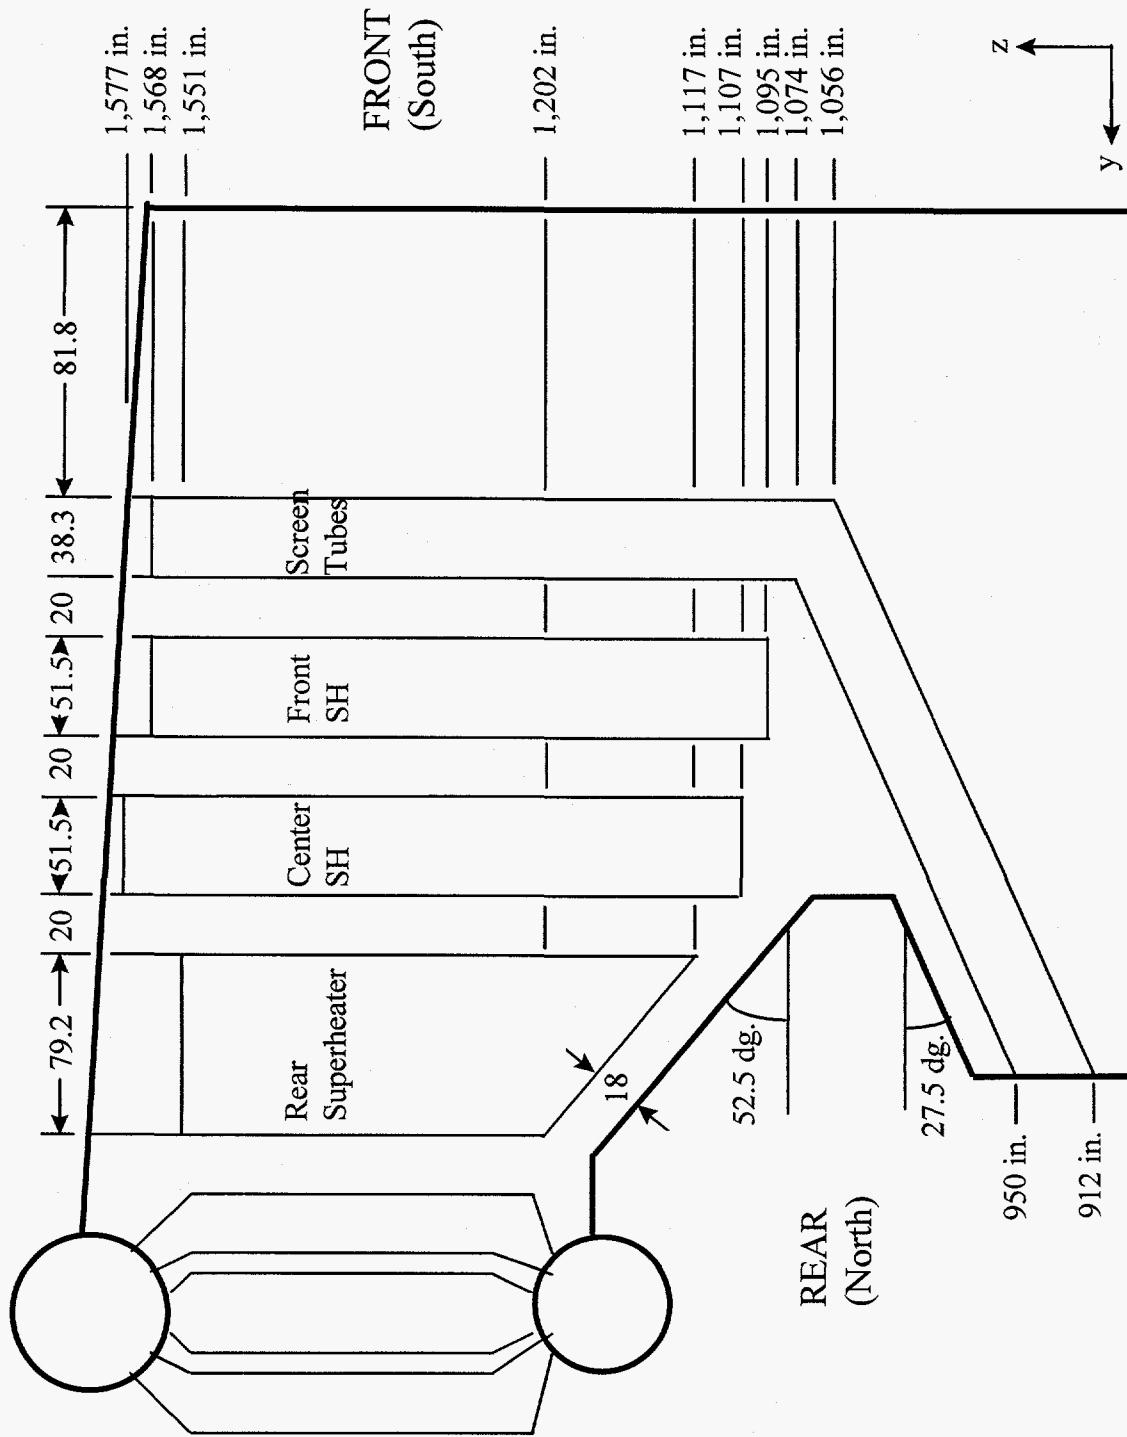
Upper Furnace Tube Banks: Arrangement, Dimensions, and Elevations (in inches).
